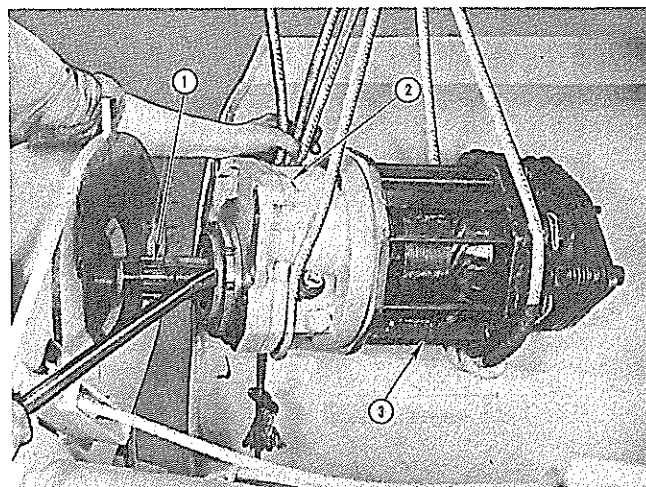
REMOVING MOTOR AND GEAR BOX
